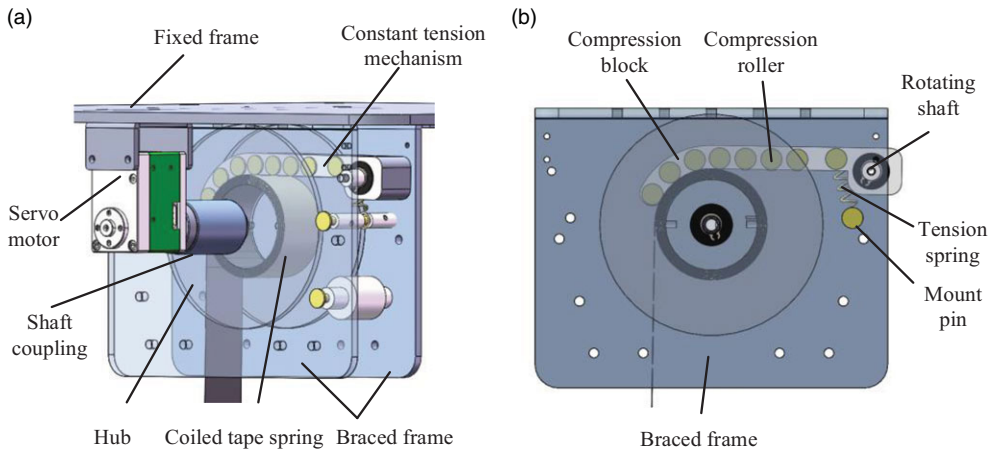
Fixed drive component. (a) Structure; (b) Constant tension mechanism.
